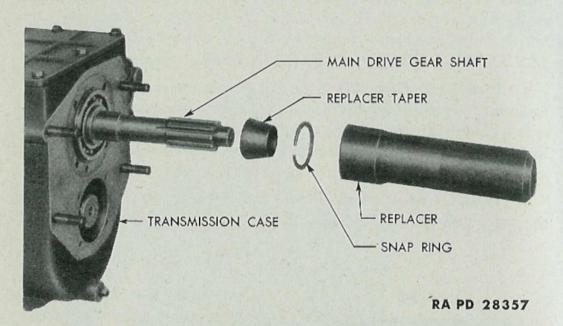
Driving Main Drive Gear Snap Ring on Main Shaft with Snap Ring Replacer 41-R-2396-29
